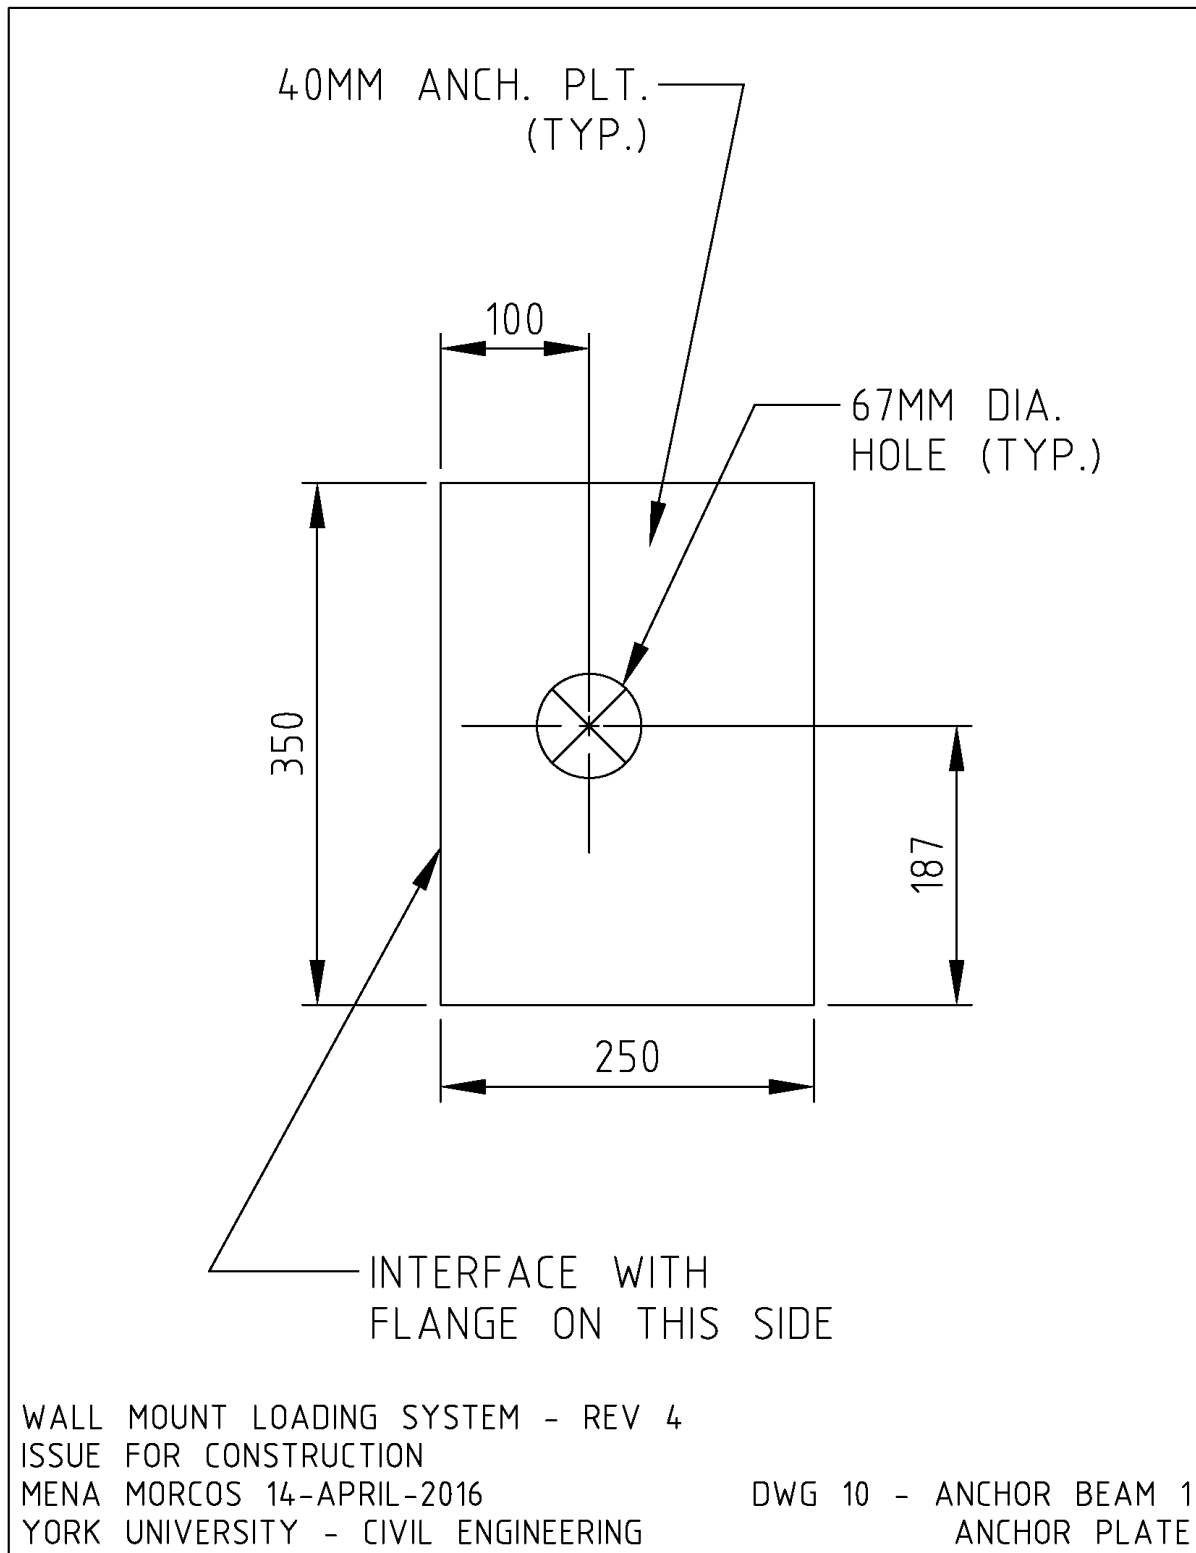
Wall mount loading system design and fabrication drawing – Drawing 10.
